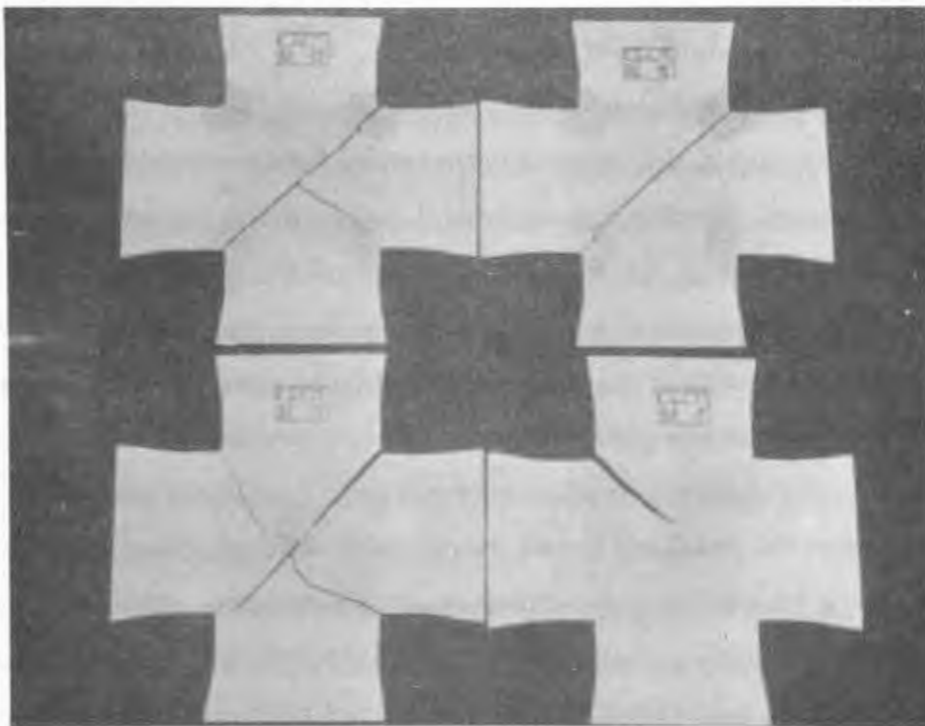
Brittle fractures in cruciform specimens. In the two upper specimens (No. B1 and B2) the corners, the initiation points of the specimens, were locally heated. In the two specimens at the bottom (B3 and B4) the central parts of the specimens were locally heated. Note the arrest in the heated zone (specimen B4) region of high residual tensile stresses. (The heated spots are slightly shadowed.)
